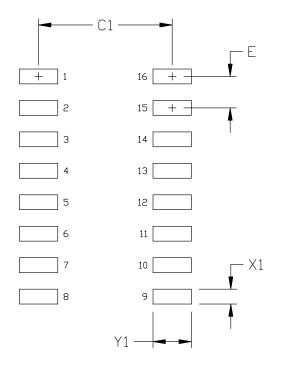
SOIC16 PCB Land Pattern Drawing
